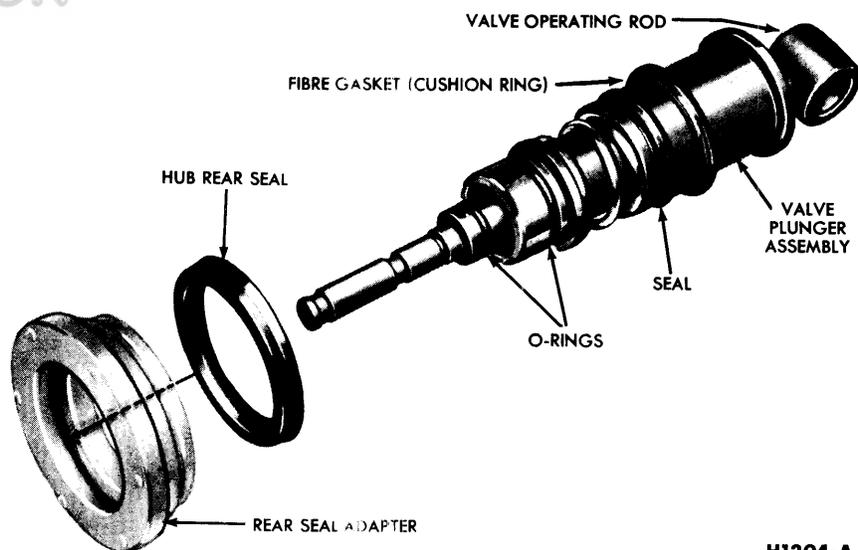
Valve Operating Rod, Plunger and Rear Seal
